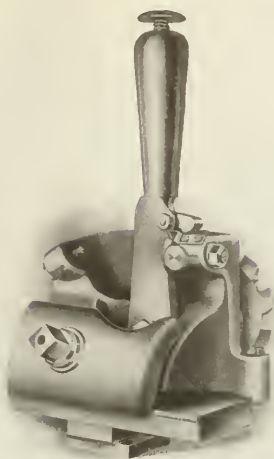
Rivett-Dock Thread Cutting Tool Assembled
